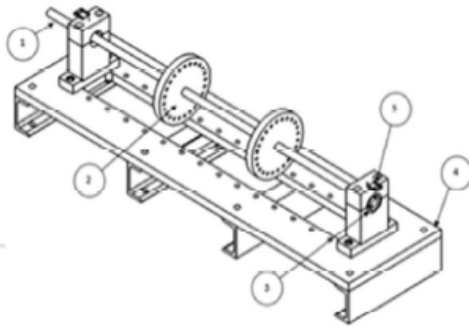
Diagram of prototype. 1) shaft, 2) disc, 3) bearing, 4) frame, 5) accelerometer mounting.
